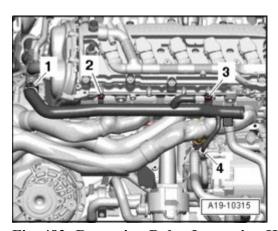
Removing Bolts, Loosening Hose Clamps And Removing Right Coolant Pipe From Coolant Hoses
